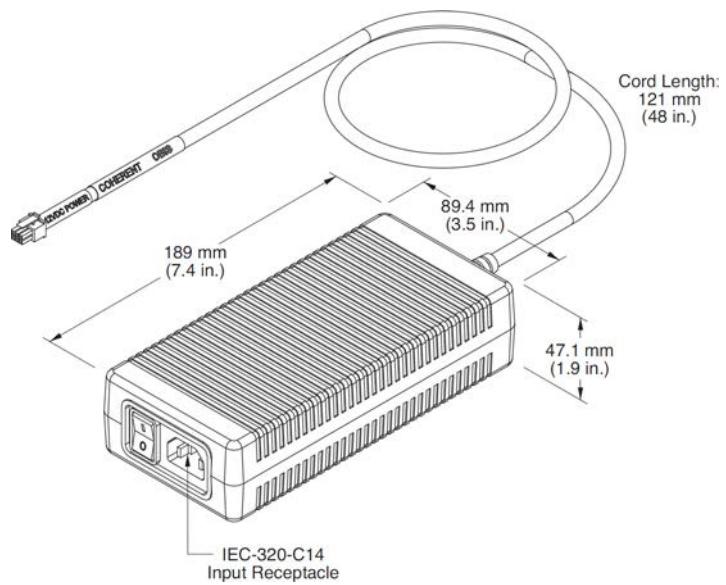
OBIS 6-Laser Remote Power Supply Dimensions
